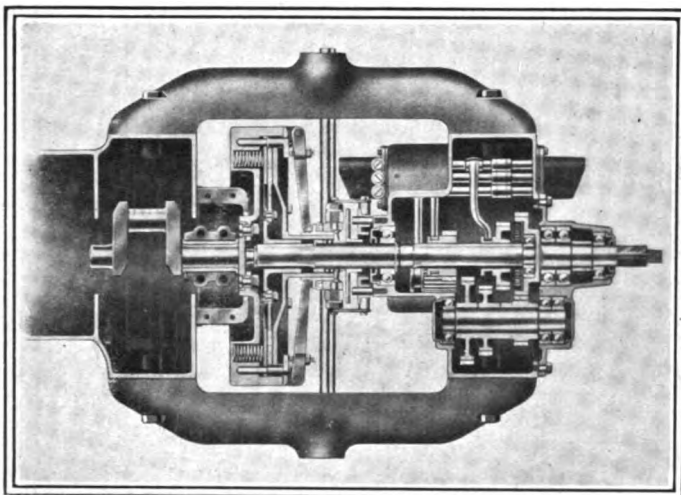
Plan view of the clutch and gearset housing with the cover removed
